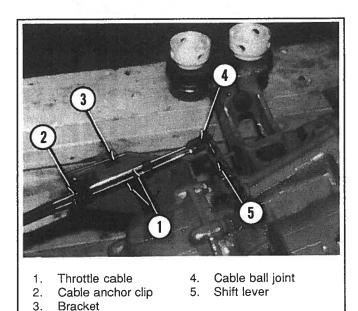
Dual-Station Shift Cable Assembly -Front Mount
